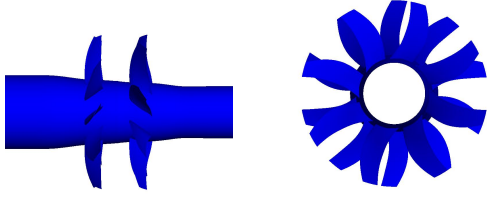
Counter Rotating Open Rotor HTC5. Left : Side view ; right : rear view
